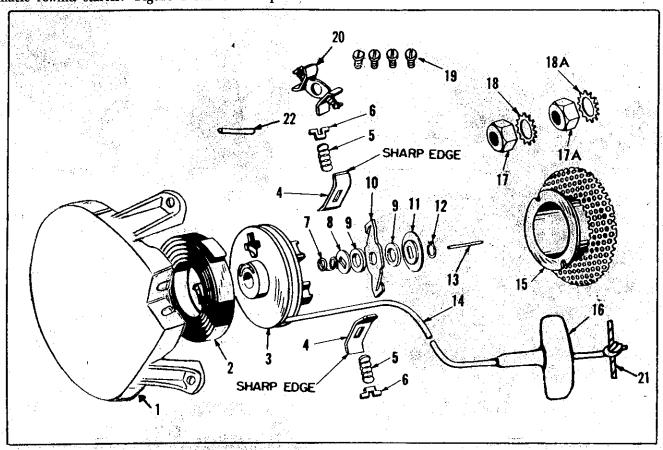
EXPLODED VIEW OF REWIND STARTER
